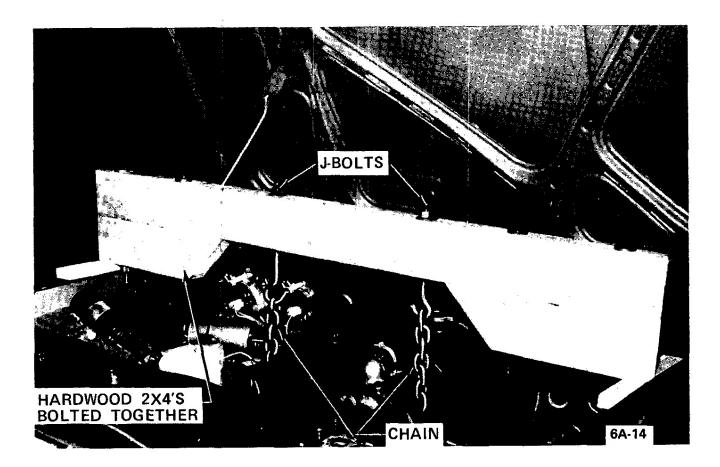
A-14 Engine Support Tool · Opel 1900 and Manta.
